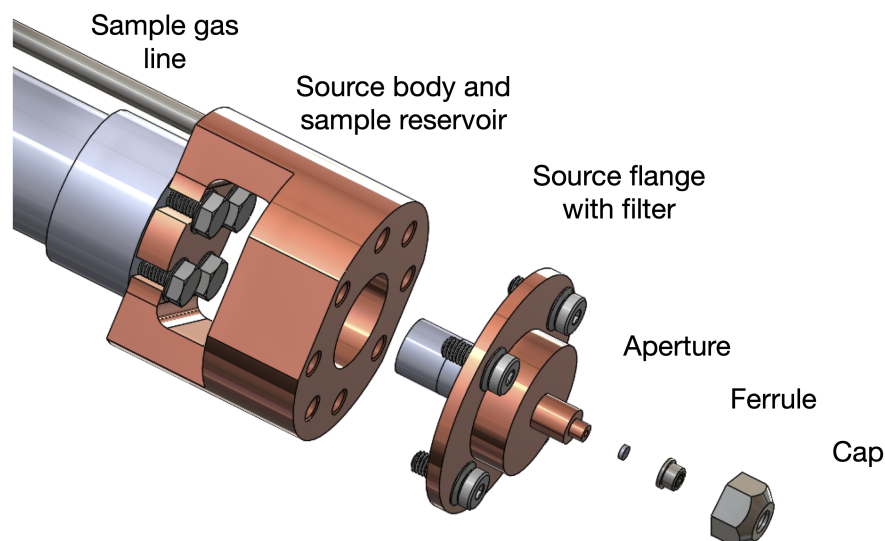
Three-dimensional exploded-view drawing of the cryogenic source assembly. Indium seals are installed between the cold finger and source body, source body and flange, and source flange and aperture.
